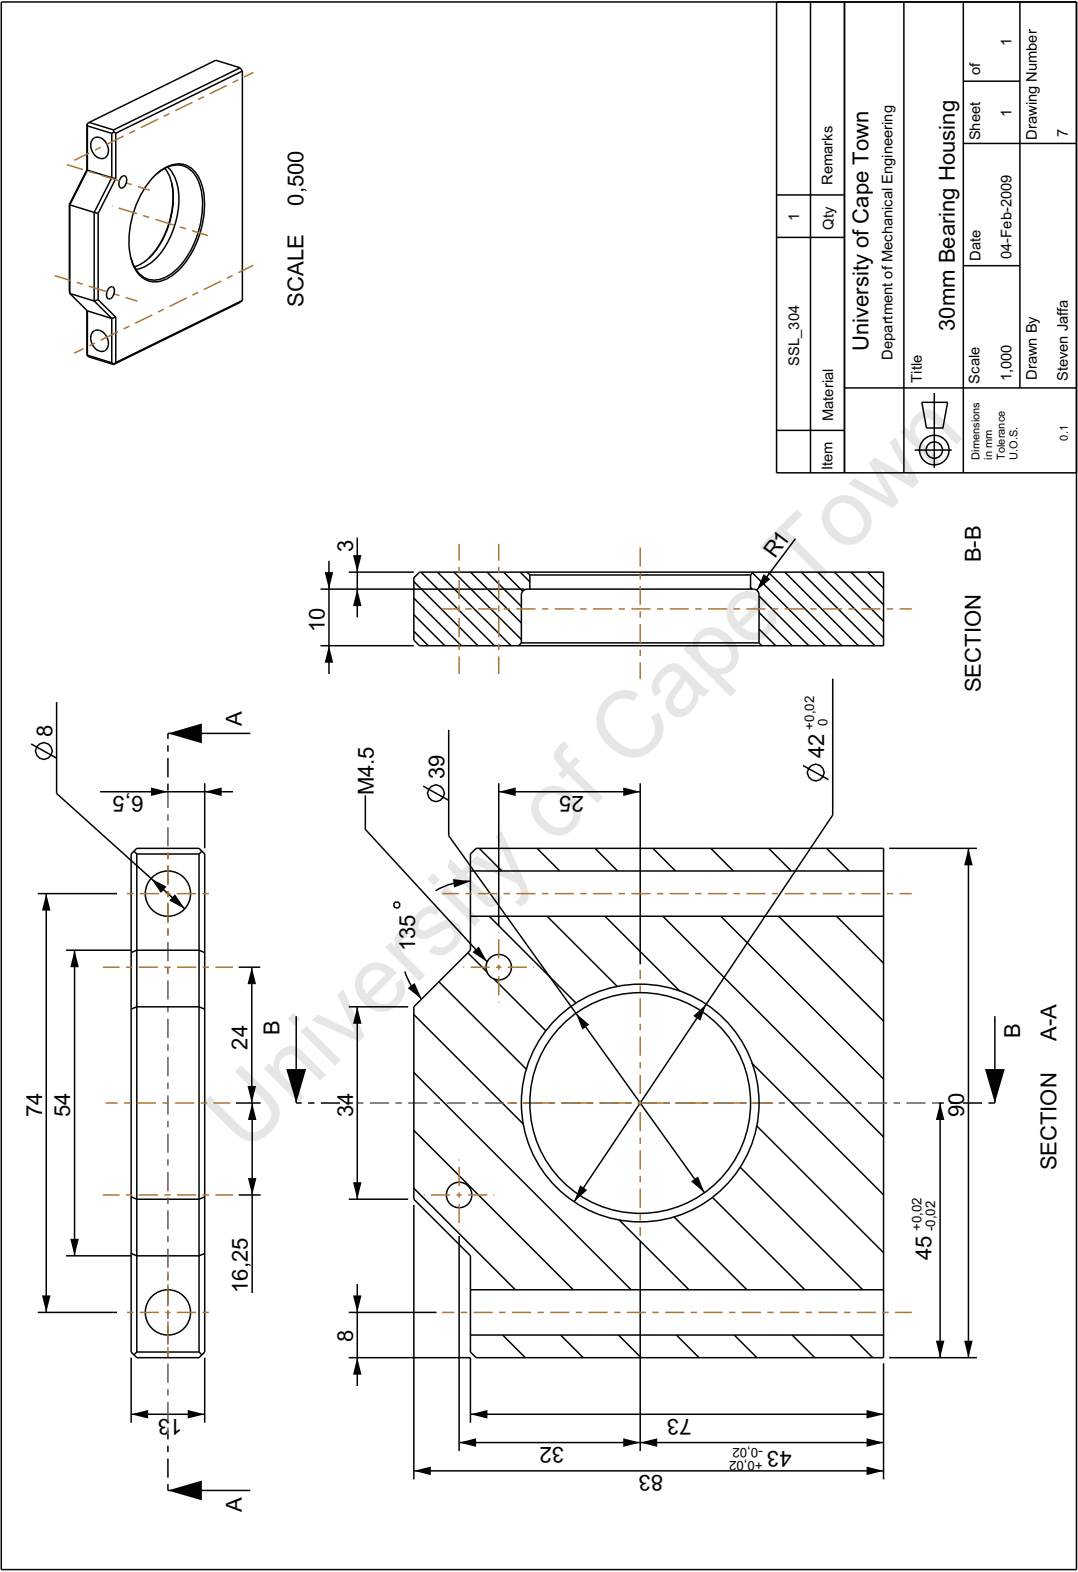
Manufacturing Drawing: 30mm Bearing Housing.
